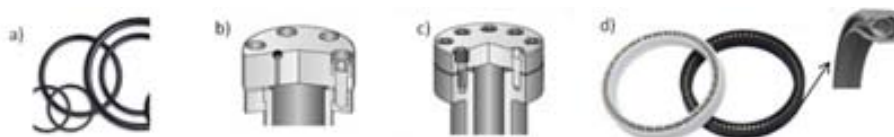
Different seals and closure systems: a) o-ring, b) EZE-S, c) bolted-closure, and d) energized spring.
